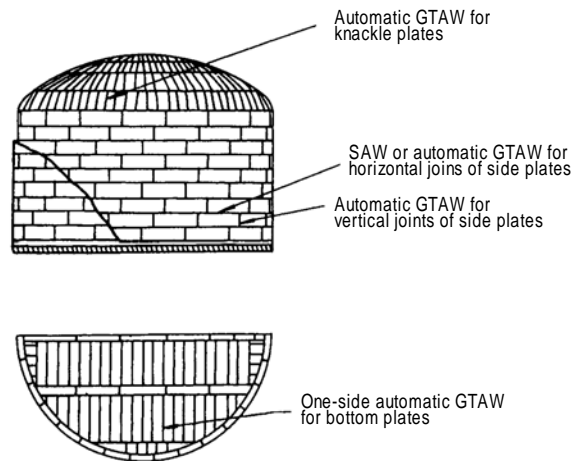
Typical applications of automatic welding processes for a LNG storage tank
